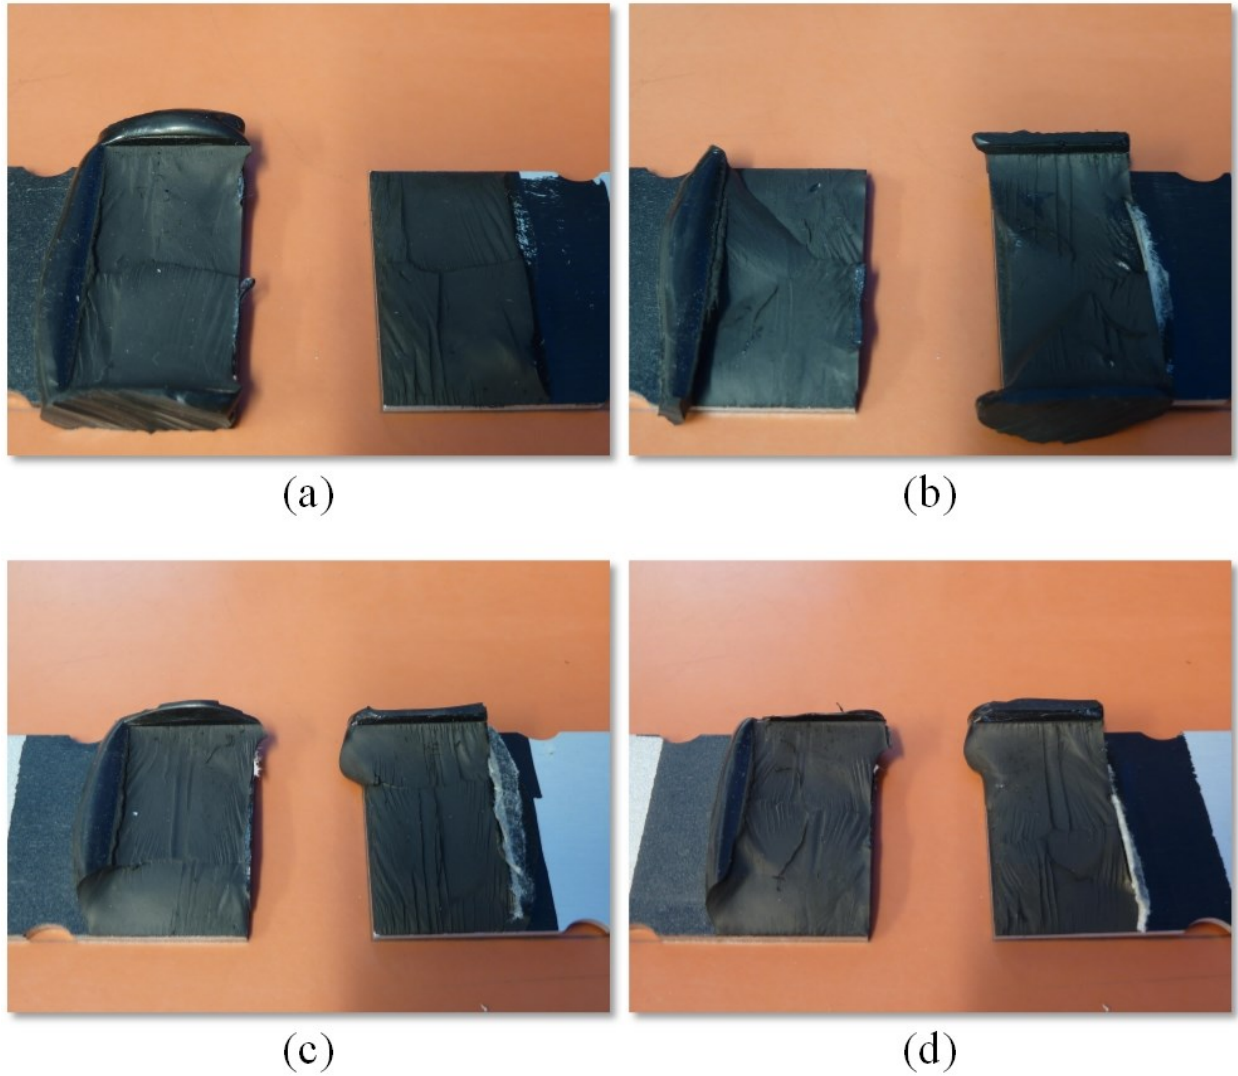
Adhesive failure: (a) specimen 1; (b) specimen 2; (c) specimen 3; (d) specimen 4
